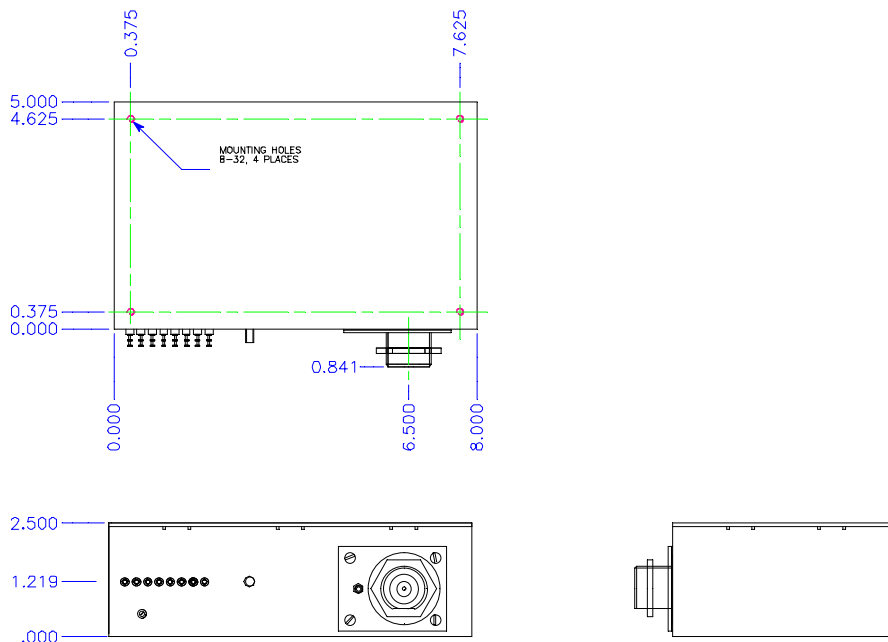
Physical layout showing the placement of mounting holes on the bottom panel of 2592 power supply
